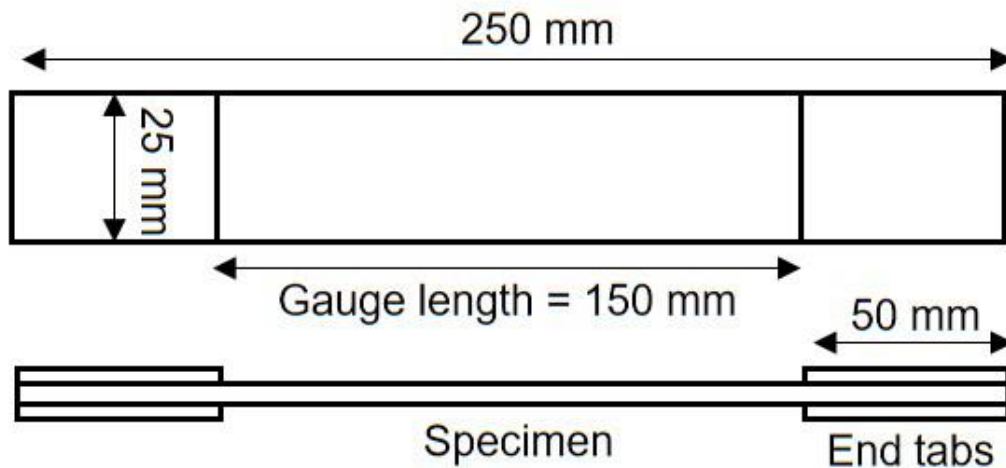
Tensile specimen dimensions ($250 \times 25 \times 2.5$ mm) according to ASTM D3039/D3039M [112].
